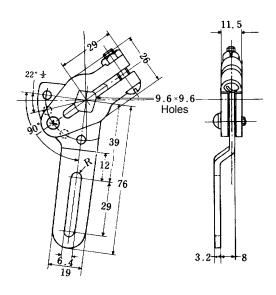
Dimensions (in mm) of crank arm (N-3128)
